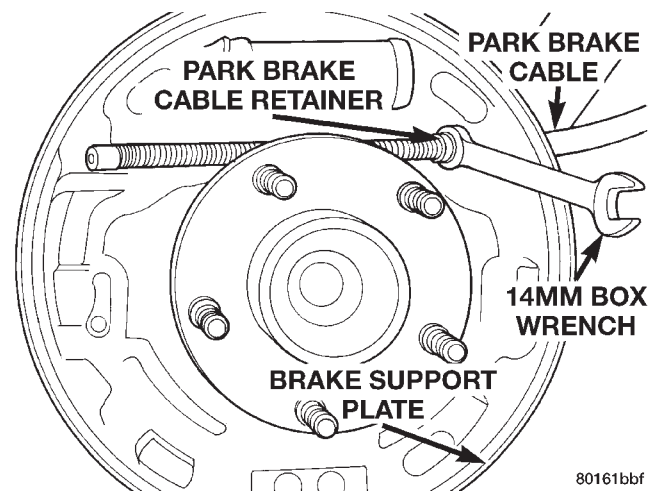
Removing Park Brake Cable From Brake Support Plate
